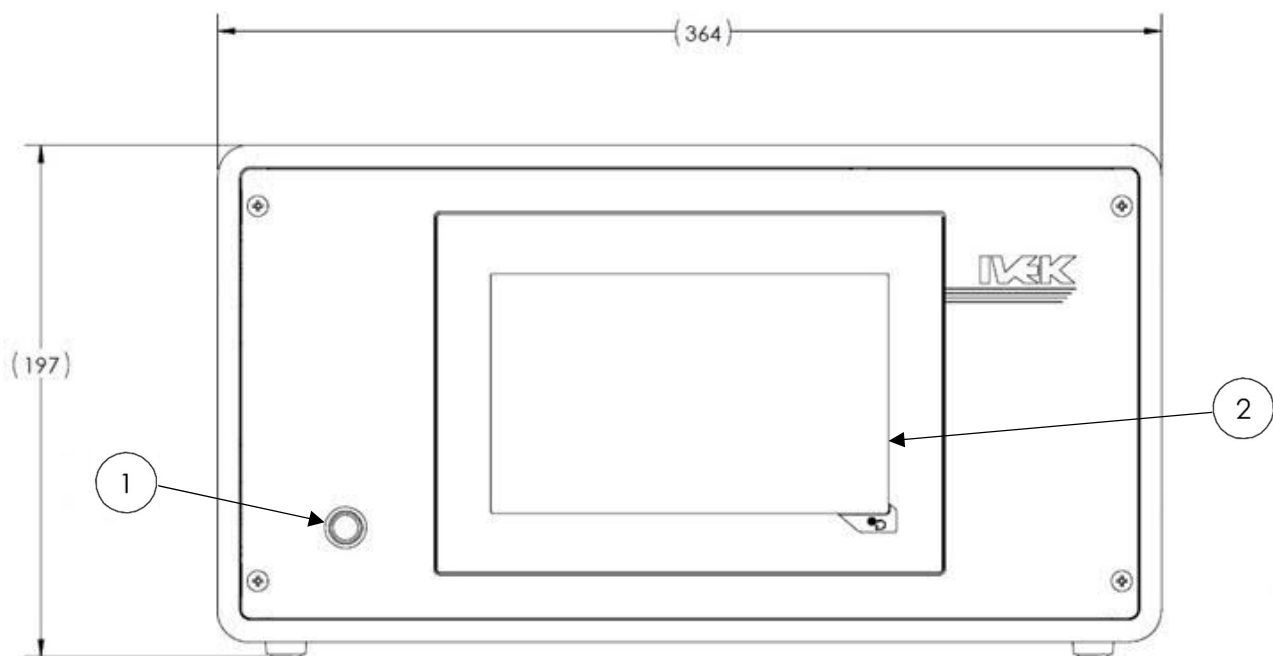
Digispense Striper Style B Controller Module Front Panel
